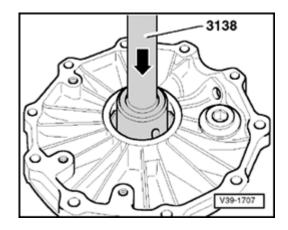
Driving outer race for large tapered roller bearing out of cover
